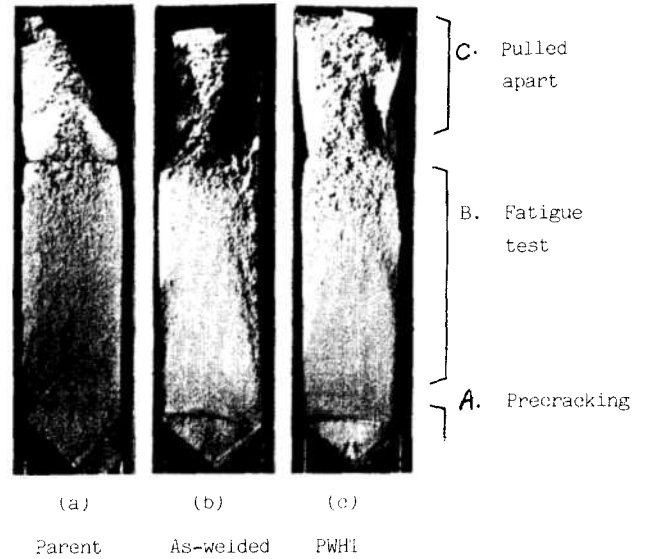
Typical macro fracture surfaces for constant amplitude tests
